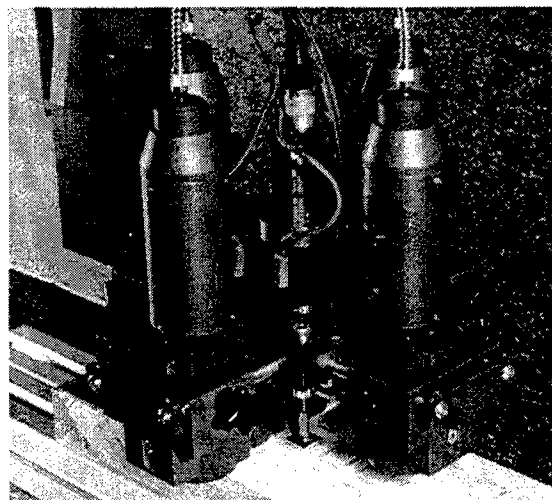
Pick-and-Joining-Tool for laser soldering electronic components
